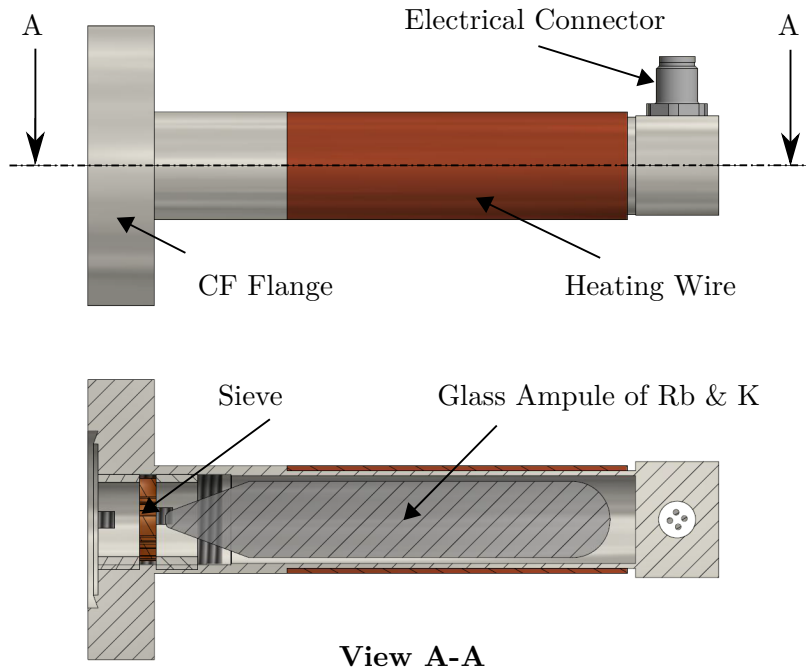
The generated CAD-Model of the new Rb and K oven design is shown. In detail view A, the inside of the design as carried out within this thesis is pointed out.
